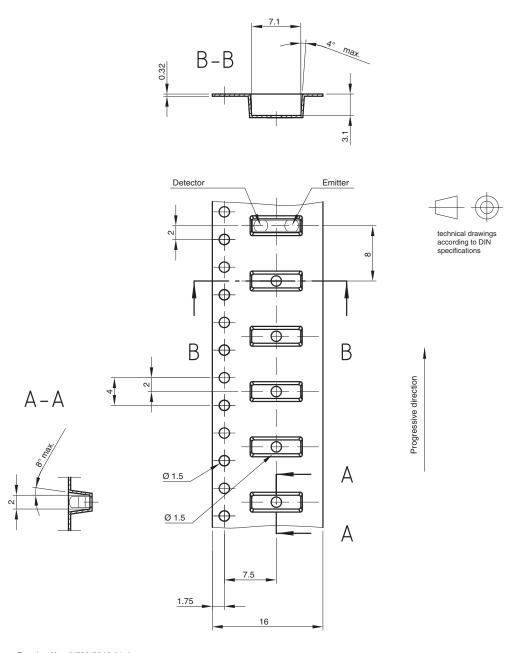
Issue: prel. copy; 24.11.04
